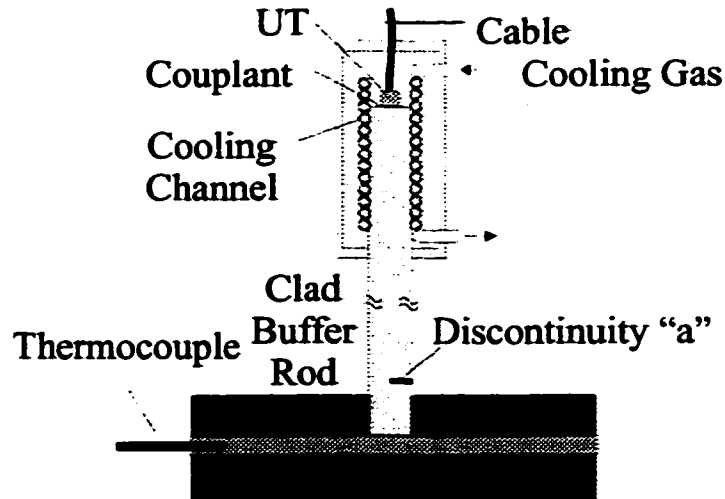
A clad buffer rod with one discontinuity, inside the Al mold
